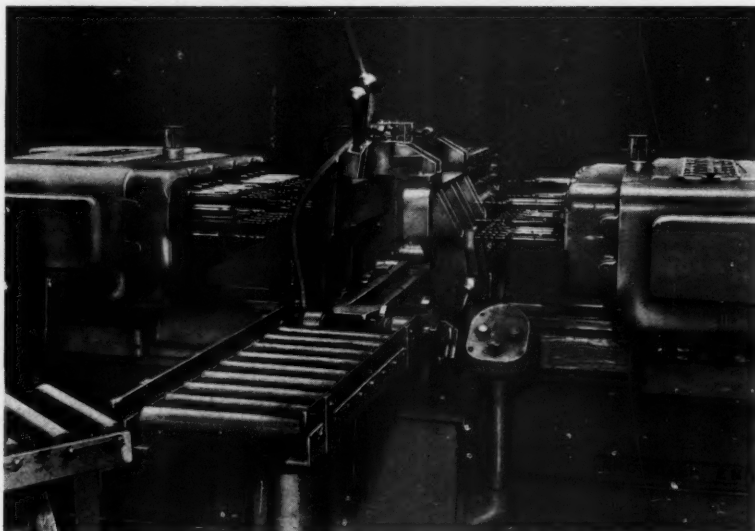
An Archdale duplex drilling machine for drilling holes in both sides of the block.
